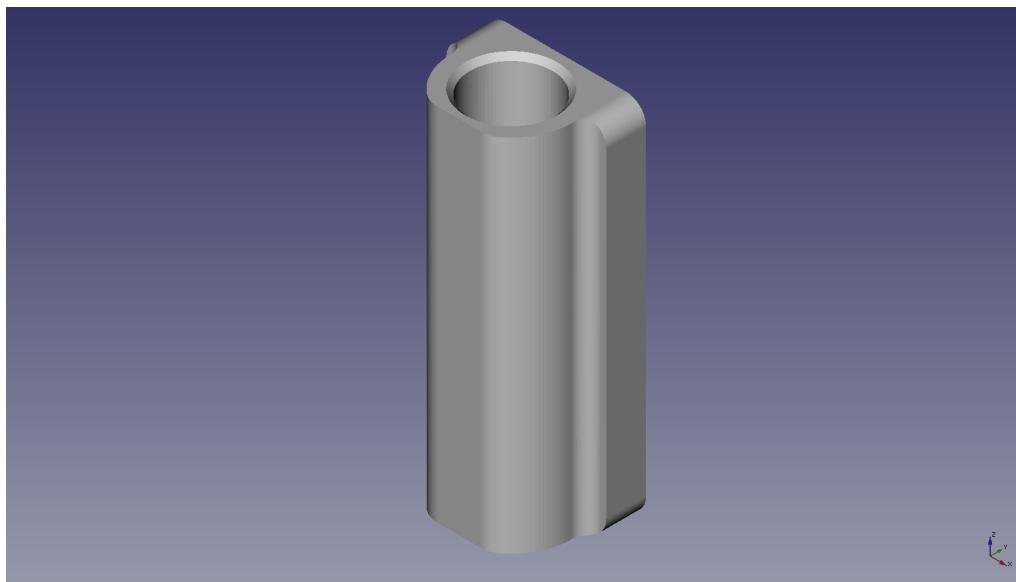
Begonia 3D Printed Double Bearing Holder Render
